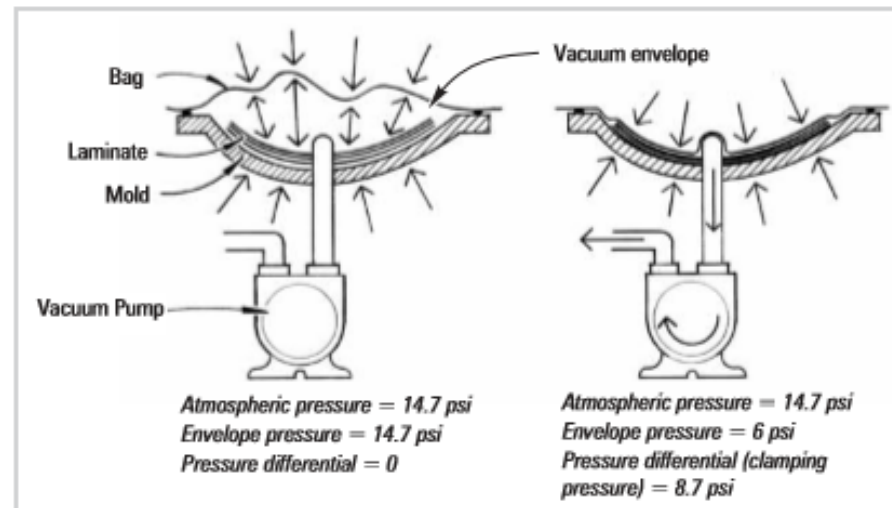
A typical vacuum bagging lay-up before and after vacuum is applied.
